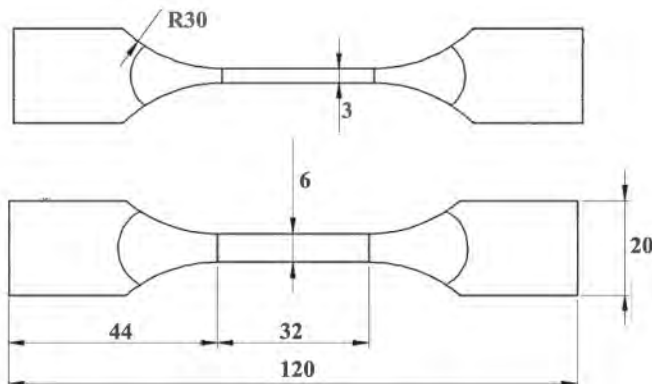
Schematic representation of tensile specimen. All dimensions indicated are in mm.
